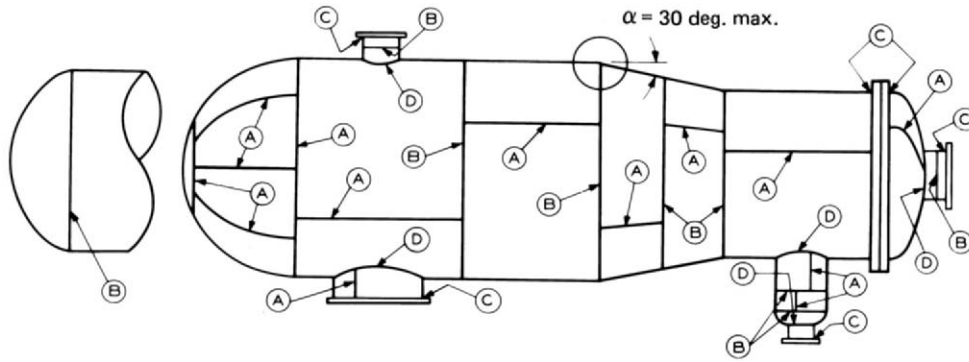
ILLUSTRATION OF WELDED JOINT LOCATIONS TYPICAL OF CATEGORIES A, B, C, AND D
